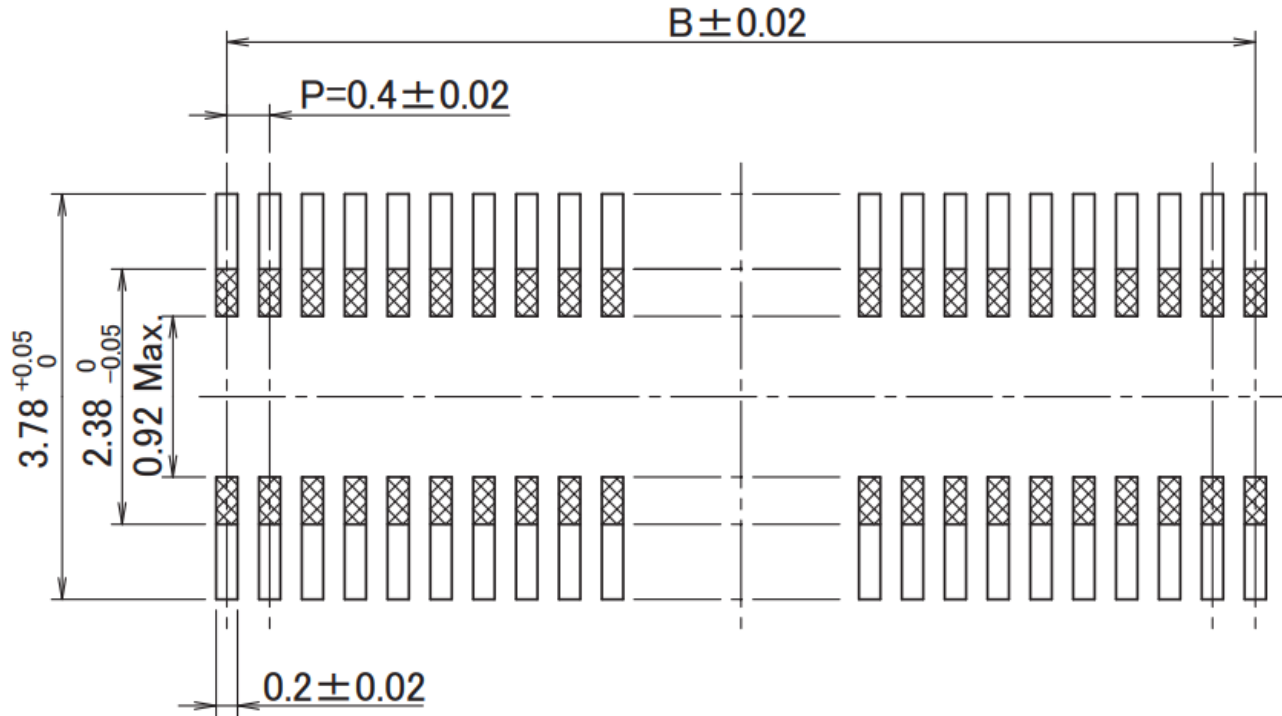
MM70-314B1-2-R300 Recommended PCB Footprint
